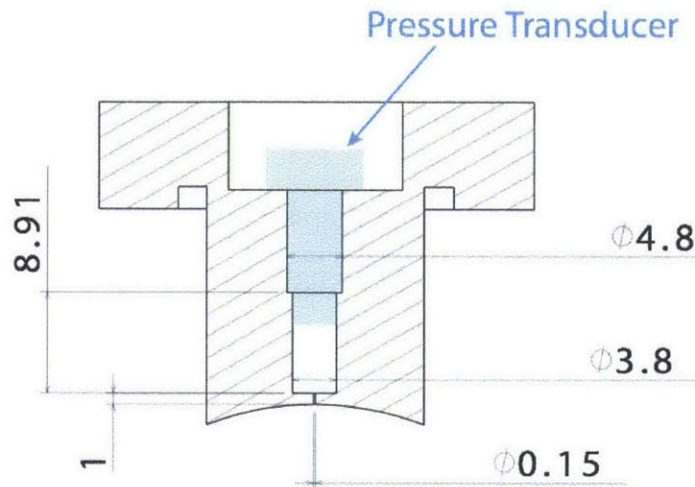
Initial HR geometry for shock tube tests, light blue indicates pressure transducer.
